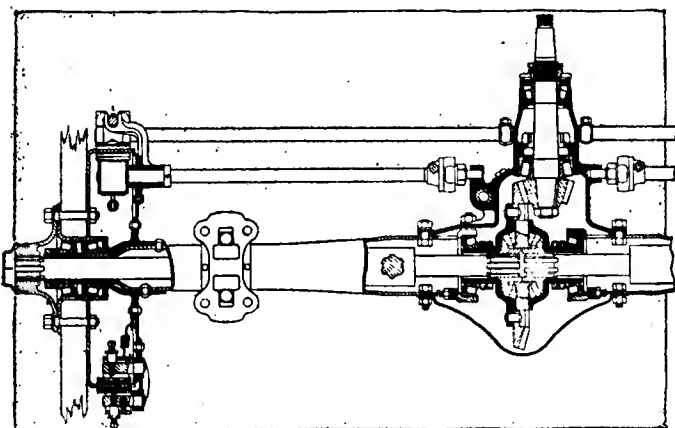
A Timken-Detroit type of floating rear axle for cars of approximately 2,700 pounds total weight. Note the double roller bearings carrying wheels
